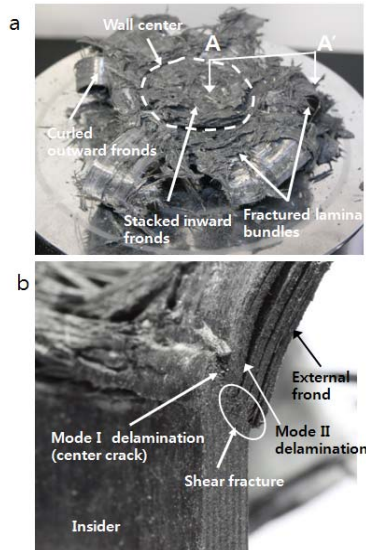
(a) Crushed carbon/epoxy tube as brittle fracturing mode and (b) Sectional view of A-A'.
